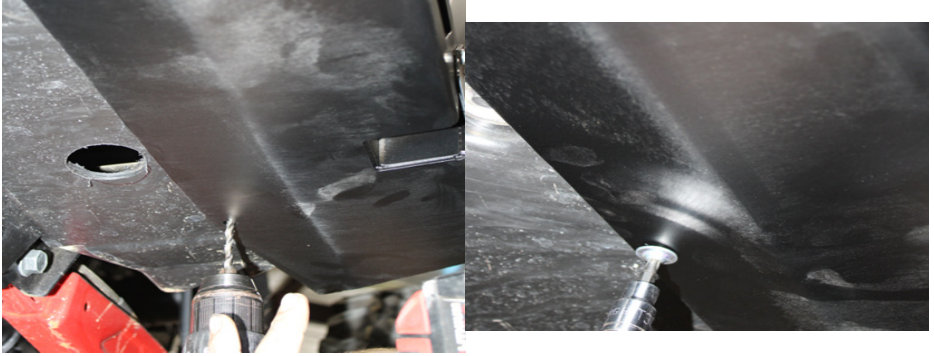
& 9 - Drill holes into frame using 3/16 drill bit, fasten Body Bolts (E) to frame using T30 Torx.
